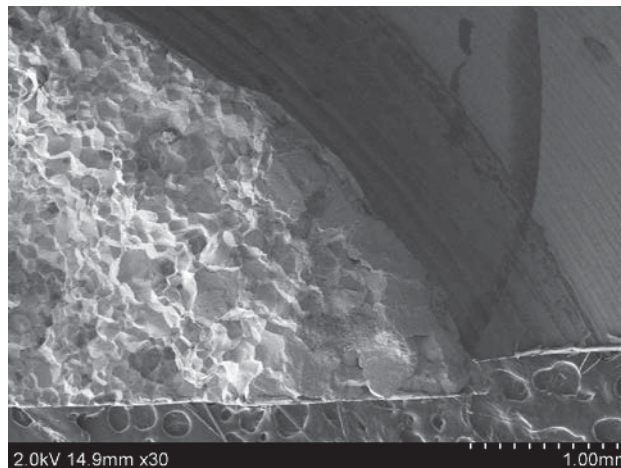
FF1, Specimen III, showing evidence of intergranular cracking.
